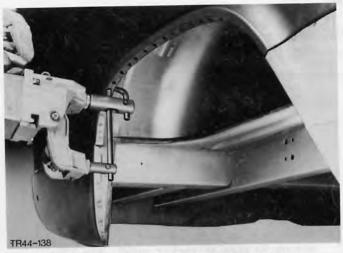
Spot weld side panel at connection to wheel house.
